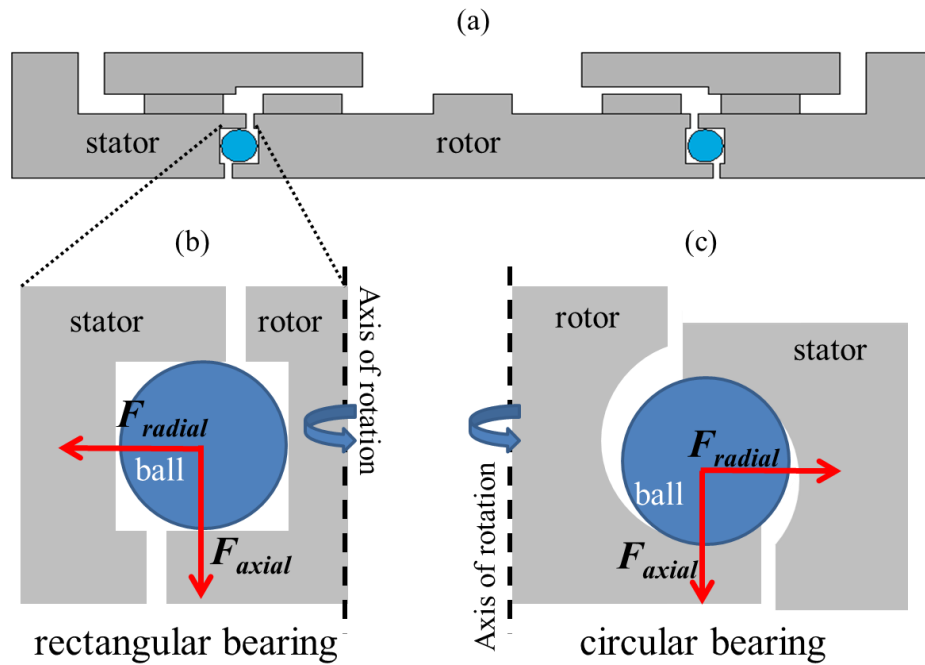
Comparison of bearing geometries. (a) schematic of microturbine to show location of bearings (b)rectangular cross-section bearing defined by DRIE and used in previous microball bearing devices. (c)circular cross-sectioned bearing developed using custom isotropic etching techniques.
